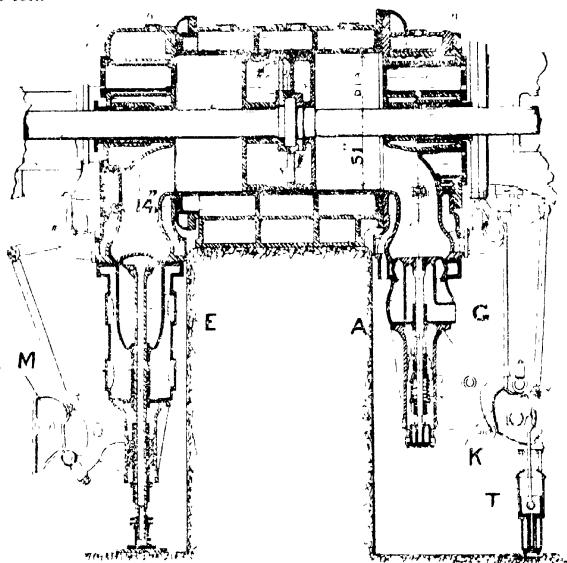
Sectional view of Richardson & Westgarth double acting gas engine, showing arrangement of admission and exhaust valves, and oscillating cam-operating gears.
